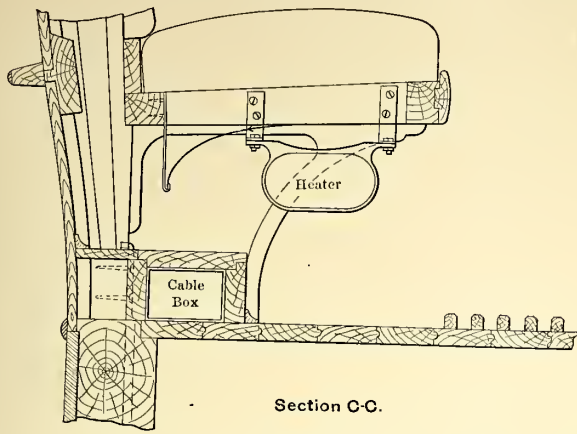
DETAIL OF SEAT, HEATER AND CABLE BOX, WASHINGTON CAR
